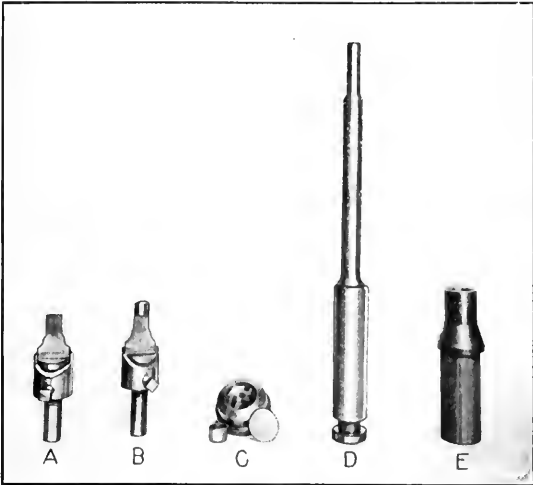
Combination Blanking Punches and Dies used for making the Nickel Jacket Cups and Tools used for making the Die
